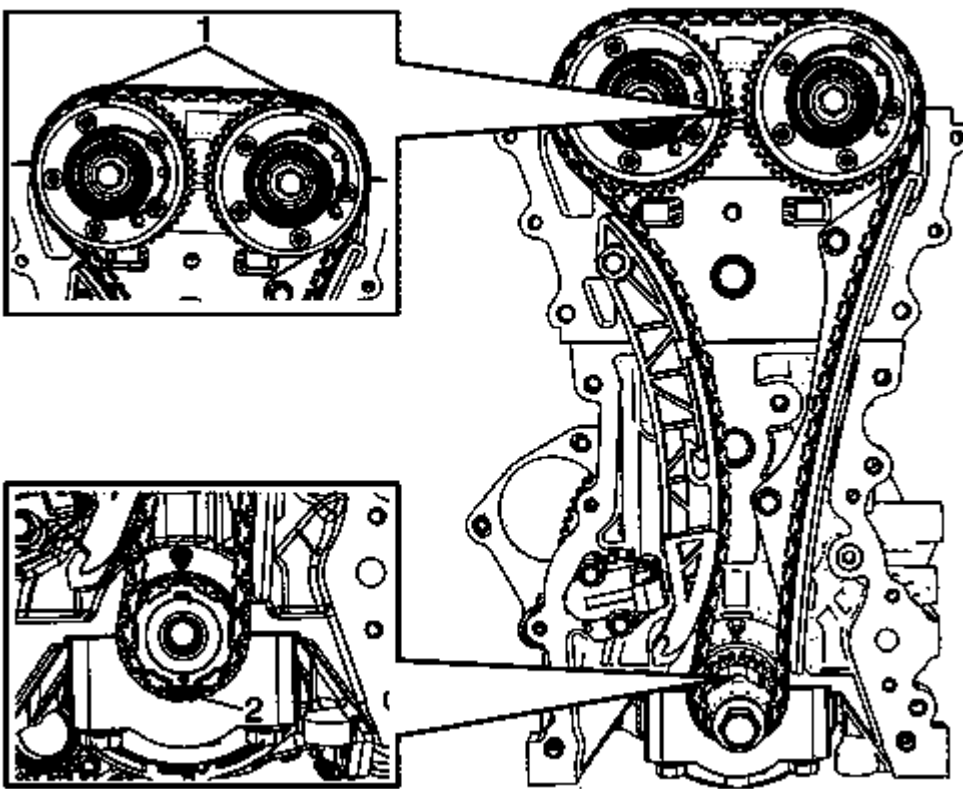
Rotating Crankshaft To TDC (Top Dead Center) Position
